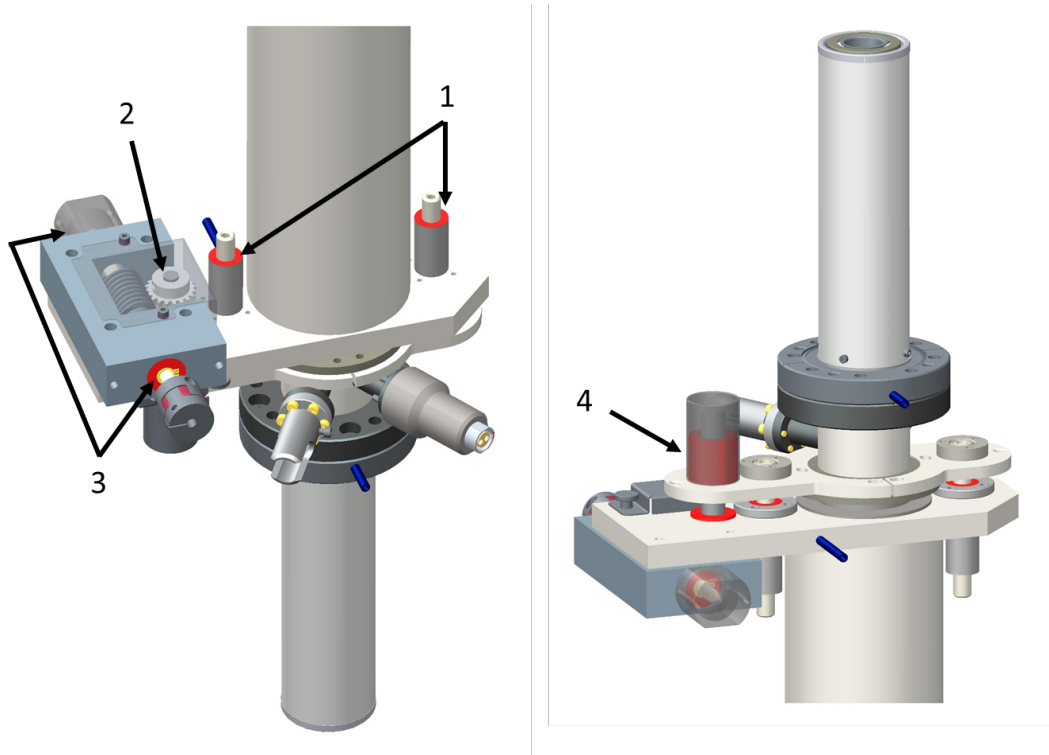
Schematic of the antimony cracker driving valve. The following parts (highlighted red) require lubrication after bake-out: 1. Linear bearings (x2), 2. Worm gear, 3. Radial bearings (x2), 4. Ball screw.
